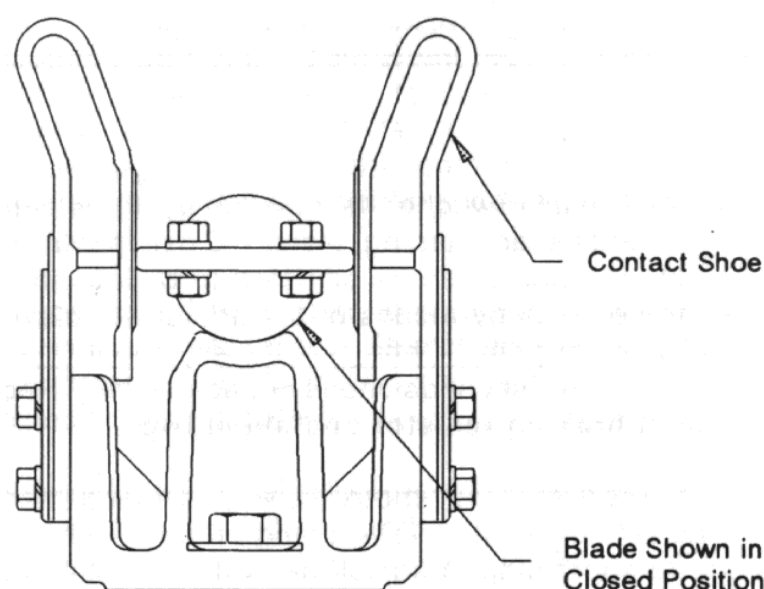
Blade Jaw Adjustment 72-265-035-441
